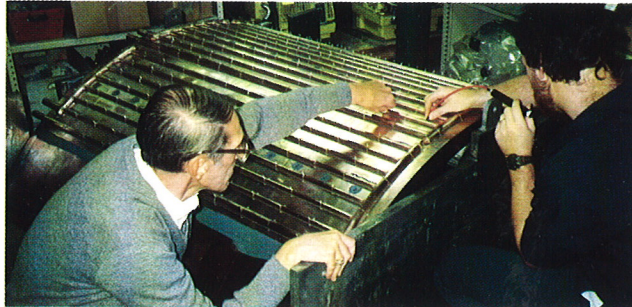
Copper heat exchanger segment is held in the stainless steel fixture during the brazing cycle.
